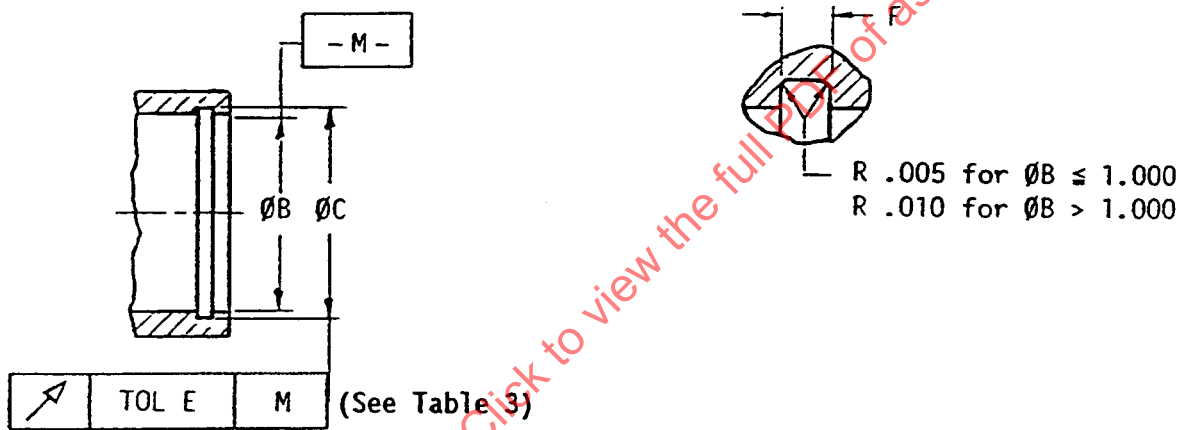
Groove dimensions, Type II, Classes 1 and 2 retaining rings
